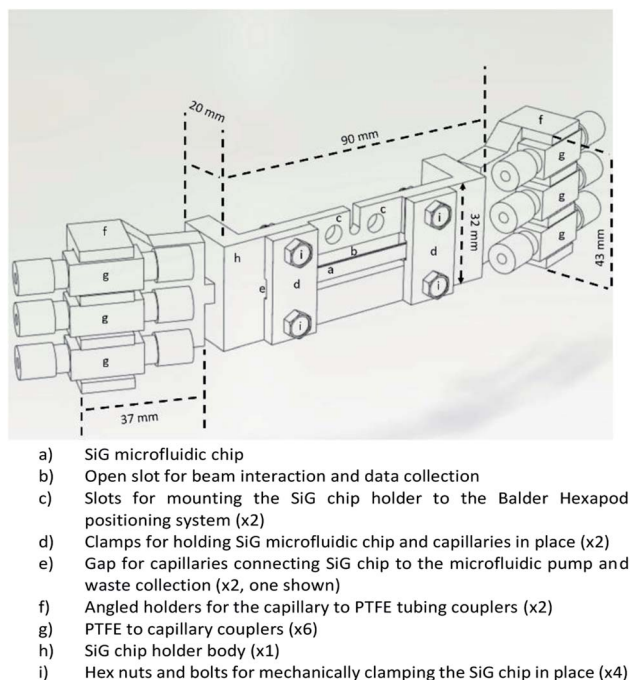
CAD image of the chip holder that supports the SiG chip mounting and angled coupling holders to prevent strain on the chip and fixings during usage.
